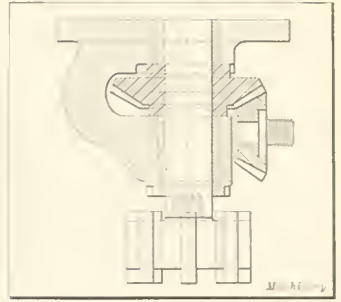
Cross-sectional View of Vertical Cutter-head shown on Machine in Fig. 1
